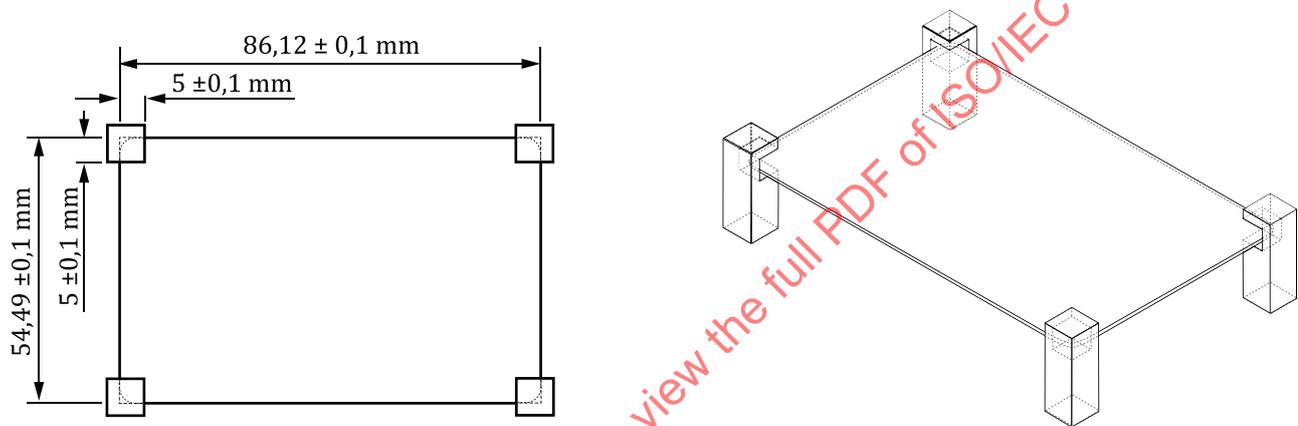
ICC holding geometry with ICC (top view and 3D view)
